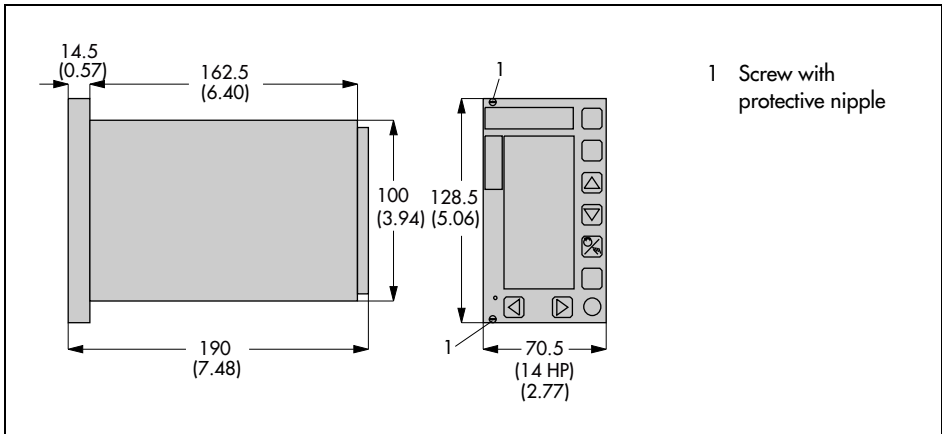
· Dimensions of the 19inch rack-mounting unit
